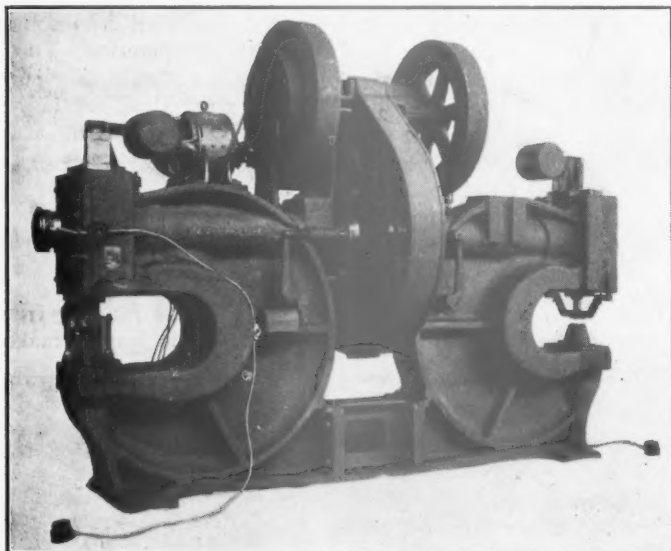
Double End Motor-Driven Punching and Shearing Machine Arranged with Electrical Control
